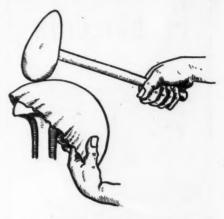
Drawing Showing Method of Shaping a Bowl by Raising
